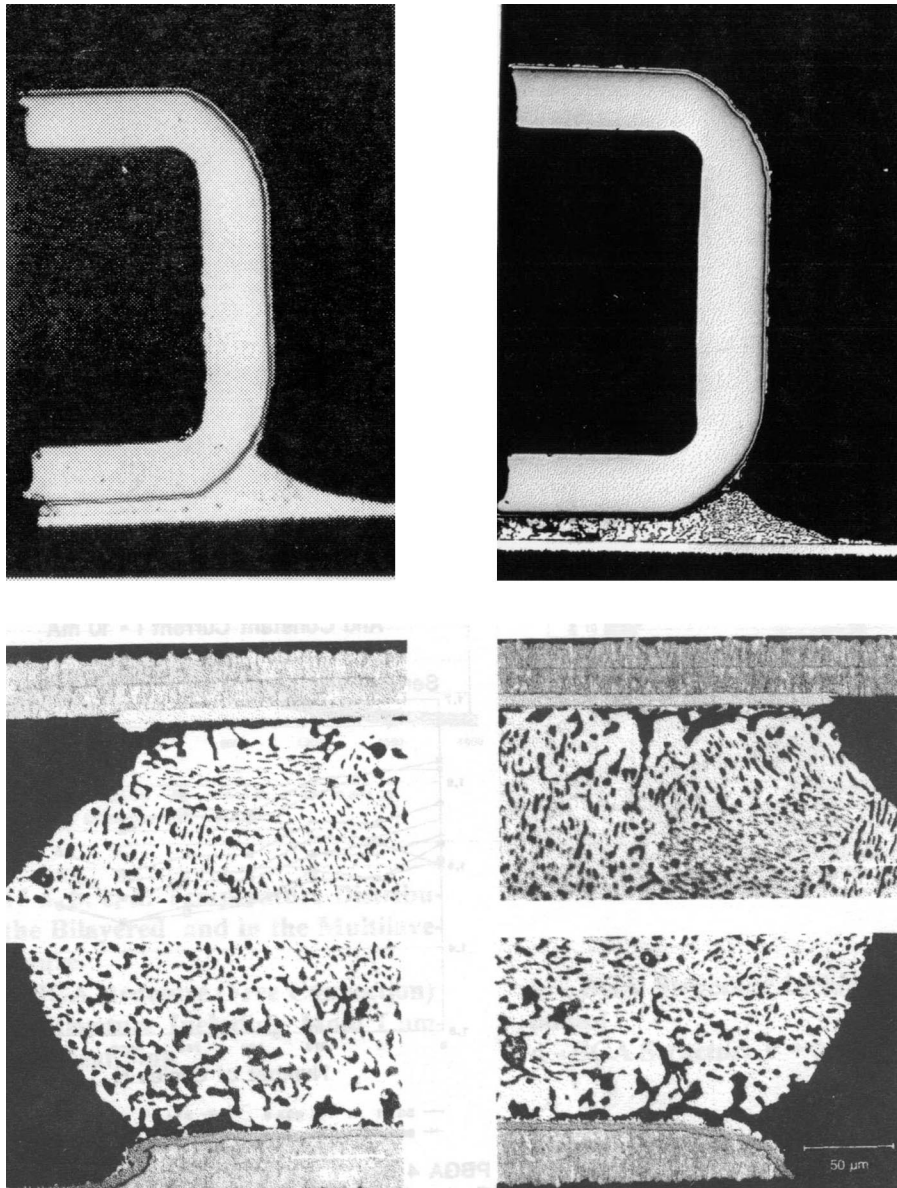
Aging of Sn–Pb solder joints used in SMT (Jendry et al., 1997; Albrecht and Gamalski, 1996).
